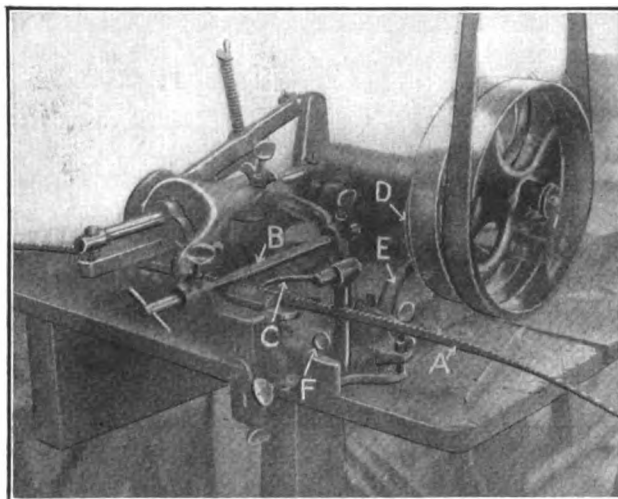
AUTOMATIC TOOTH-FILING MACHINE
